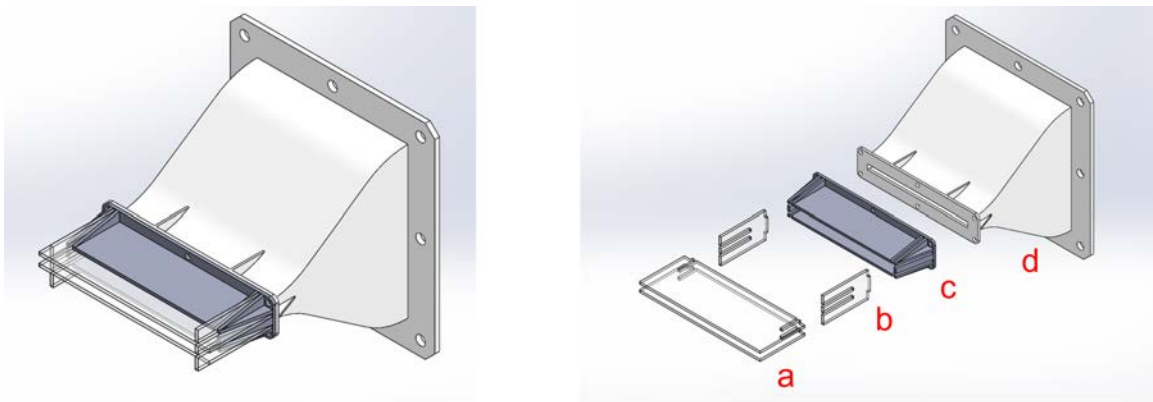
3D design of rectangular nozzle (7.5 mm \times 150 mm) AR = 20 assembly with plasma actuators. Parts (a), (b), (c), and (d) to construct the assembly are indicated in the right-side exploded view.
